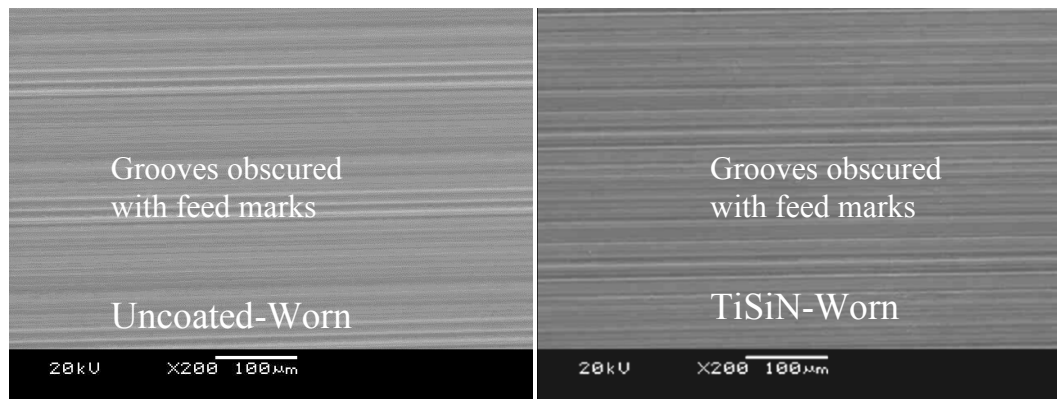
Workpiece surfaces following machining with worn uncoated and TiSiN coated inserts at cutting speed of 200m/min at 200X magnification
